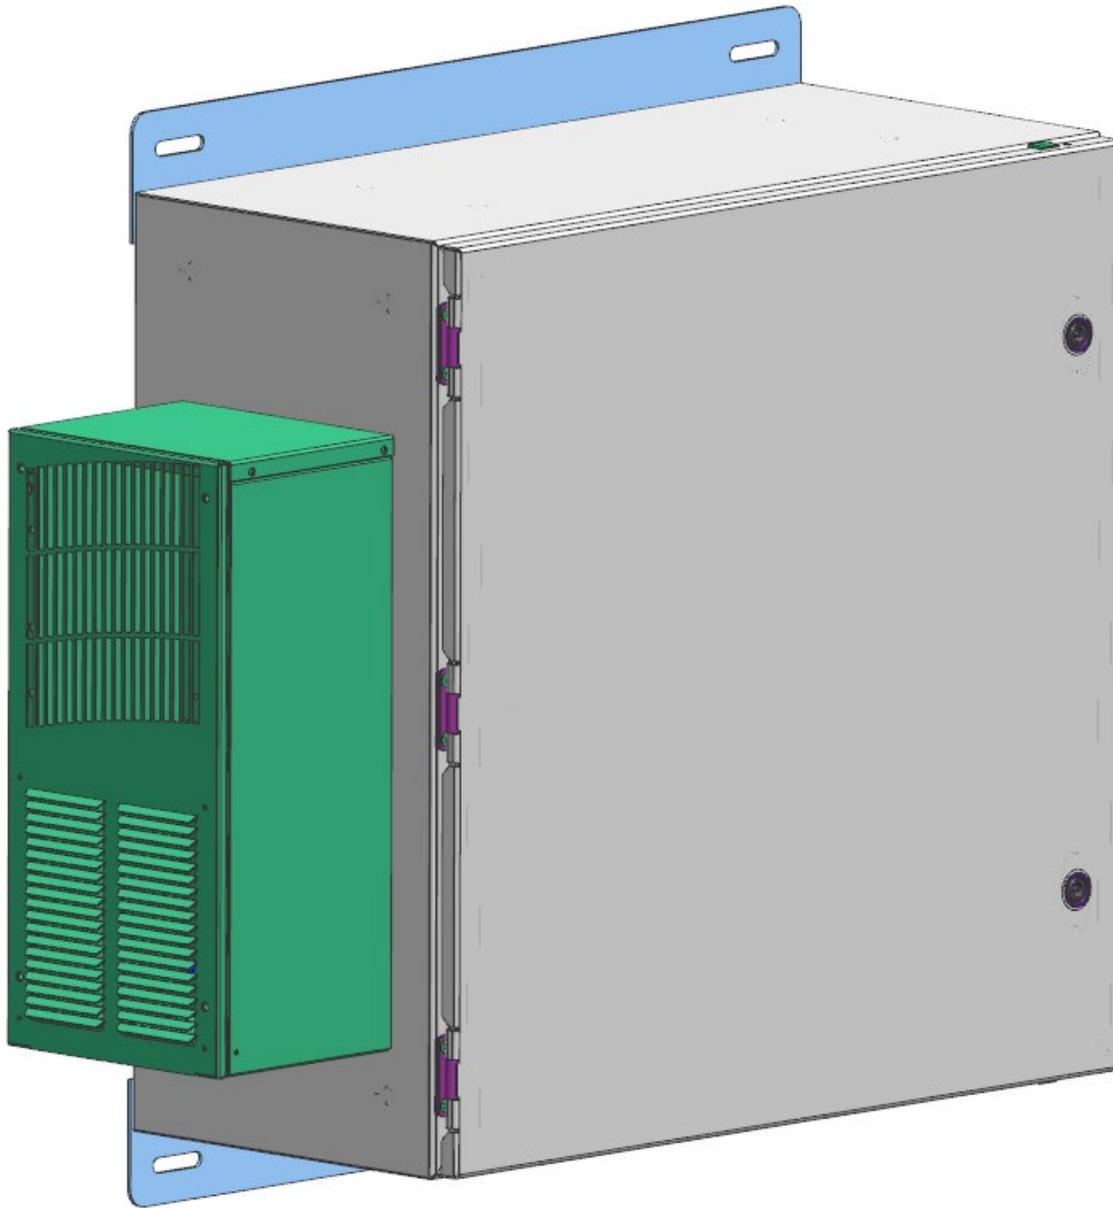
The T15 air conditioner is shown mounted to the hinge side of the Z22 enclosure.
